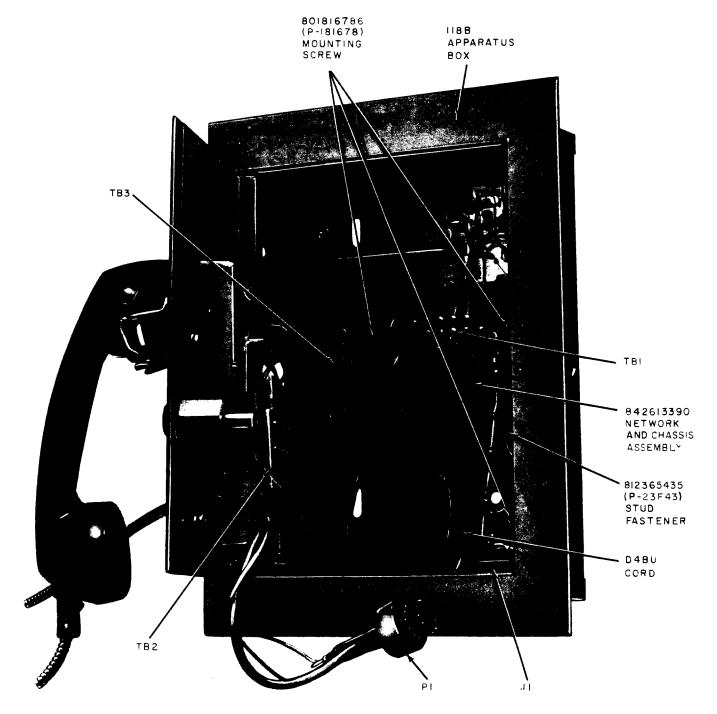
₱755AM Telephone Set Installed in 118B Apparatus Box¶
